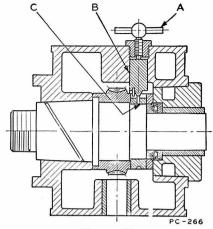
Section Through Dividing Head Showing Spindle Clamp
